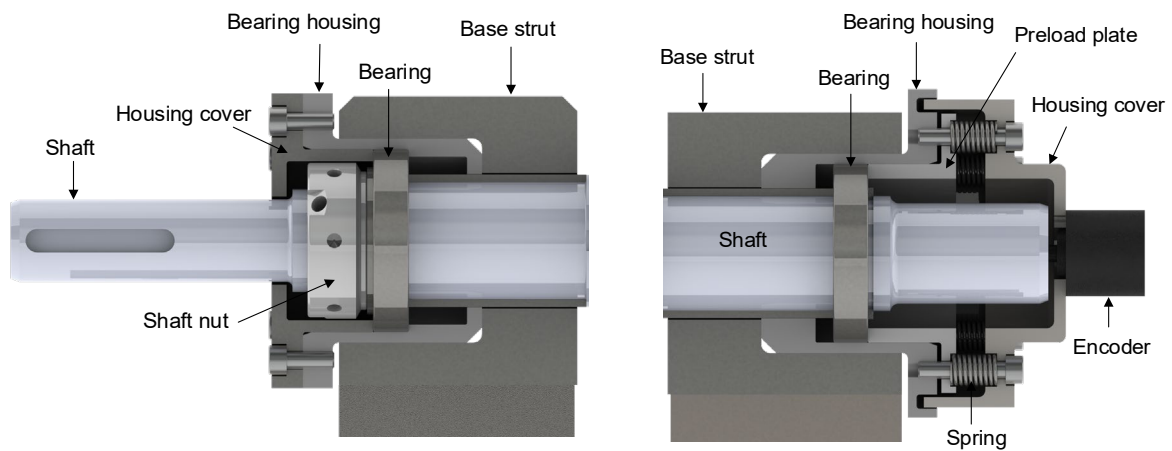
Fixed bearing side (left) and floating bearing side (right) in cross section view
